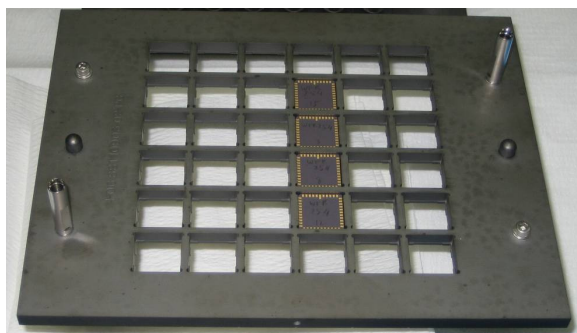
Two-Tier Package Assembly Fixture, Upper Fixture, open face of package facing down
